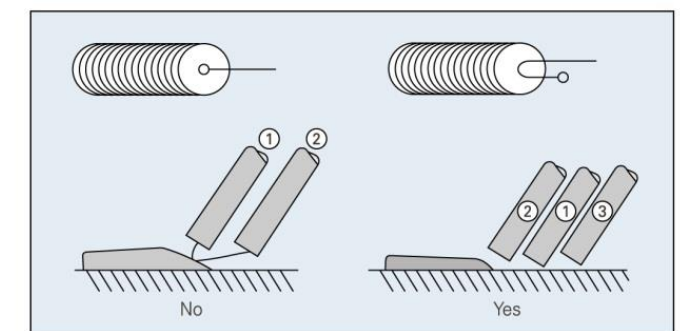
The backstep technique prevents porosity at the arc starting area of the weld bead.
